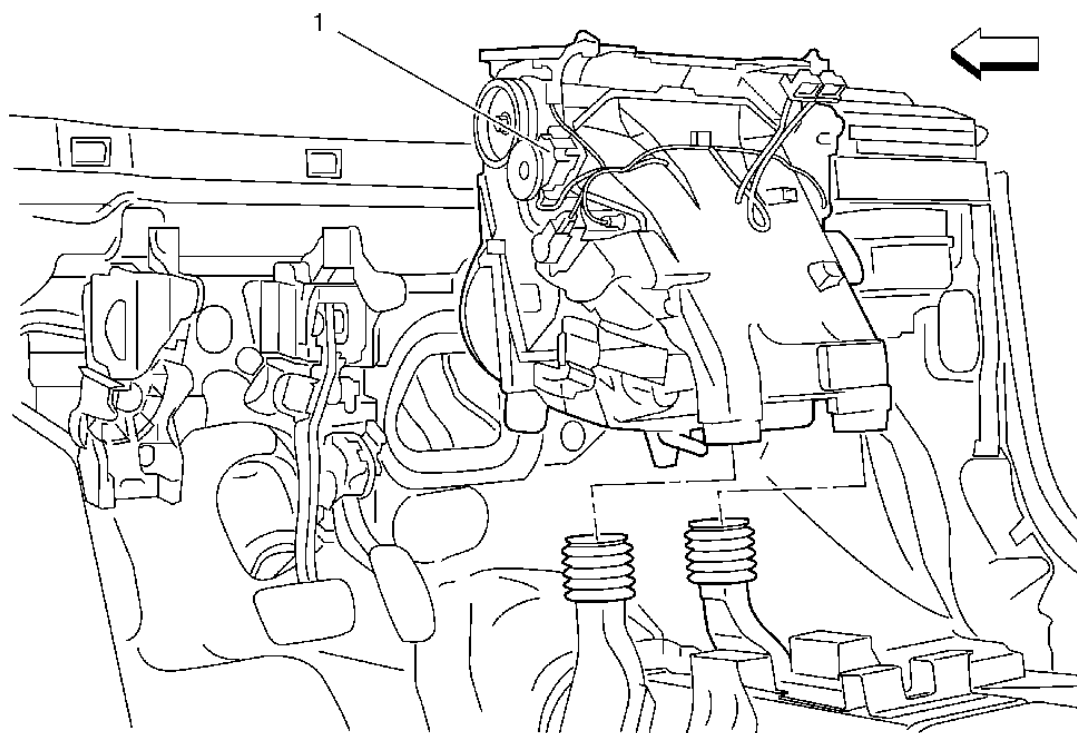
Heater And Air Conditioning Evaporator & Blower Module
